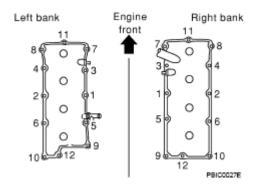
Identifying Rocker Cover (Left Bank) Mounting Bolts Loosening Sequence
